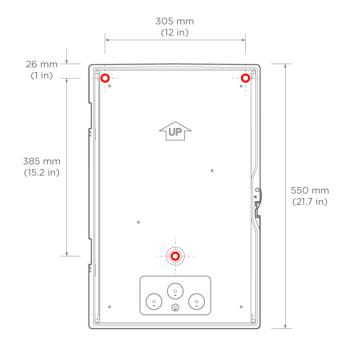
Backup Gateway Mounting Hole Locations (Front View of Enclosure)
